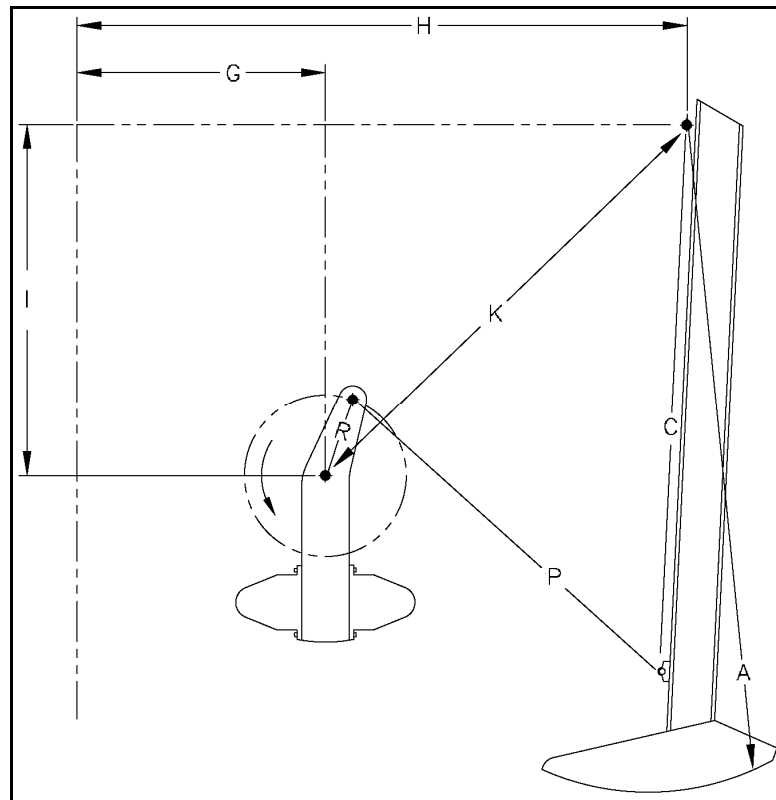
Dimensions for Mark II and Air Balanced Units
